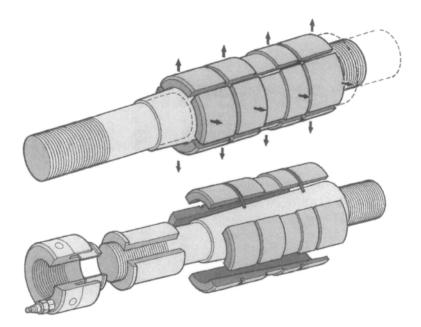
The coupling hole alignment tool (CHAT) has a longitudinally split sleeve for greater expansion. Like the radial fit bolt, it is hydraulically tensioned, but there is no hydraulic separation of core and sleeve.
